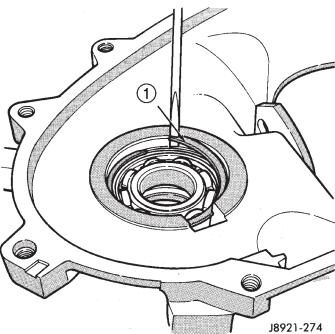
Front Output Shaft Front Bearing Snap-Ring Removal
